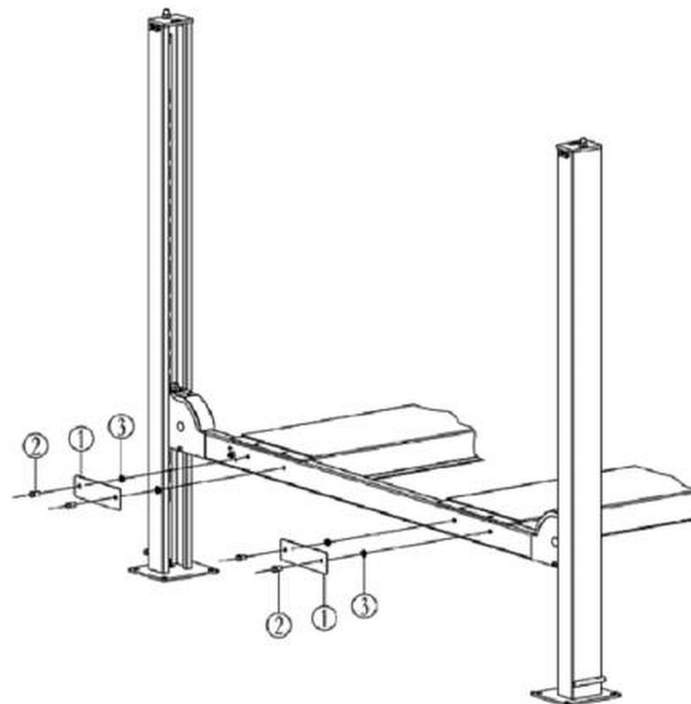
Fitting the drive-on ramp mounting plate ((1) ramp mounting plate (2) M16×25 hex head screw (3) flat washer)
